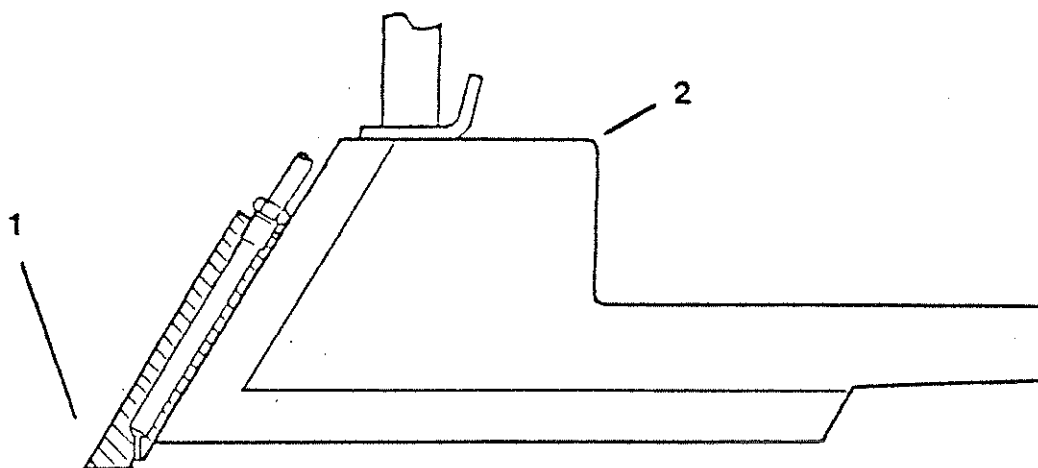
Later prototype injection coultter (1), mounted on leading edge of seed coultter (2).
